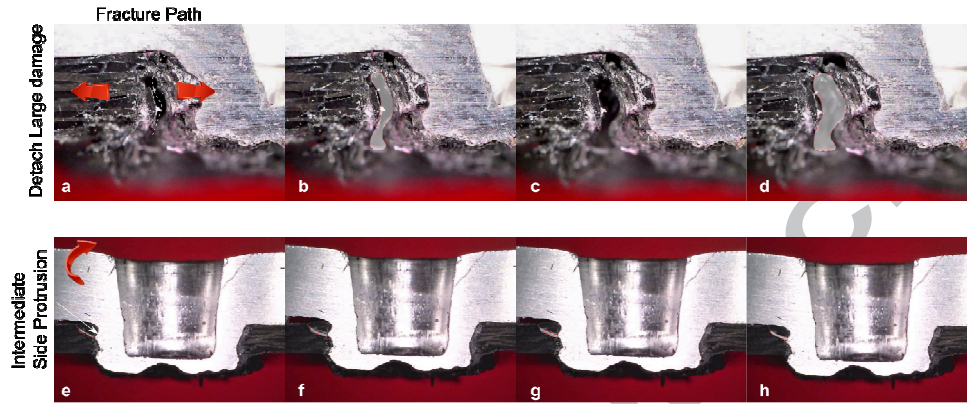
Different fracture development: a-d Detach and e-h side protrusion fracture induced.
